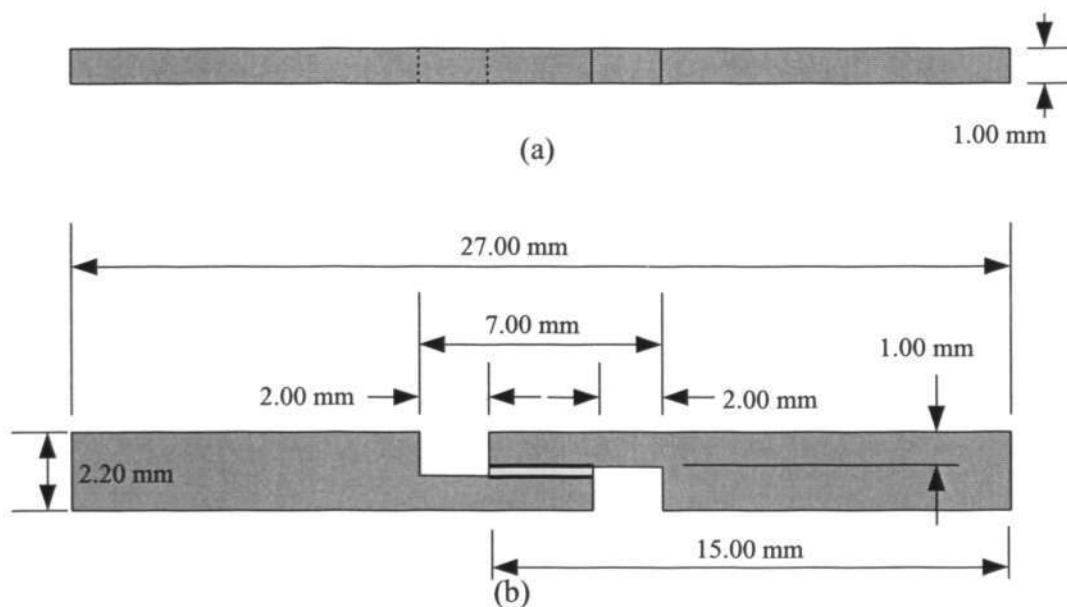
The schematic diagram of the solder/copper joint specimen (a) plane view and (b) side view
